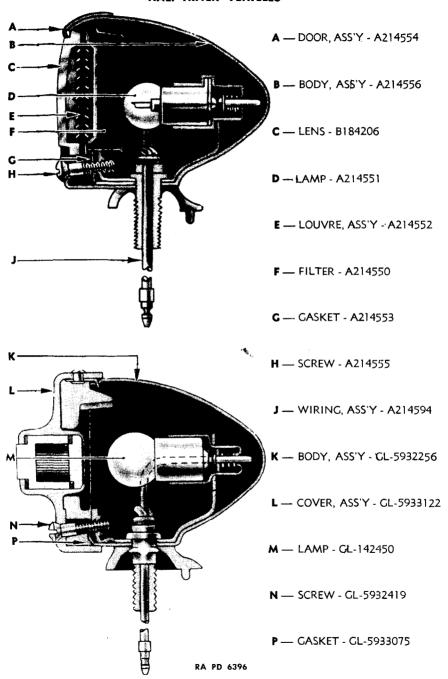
Marker Blackout Lamp Assemblies—Sectionalized 206
